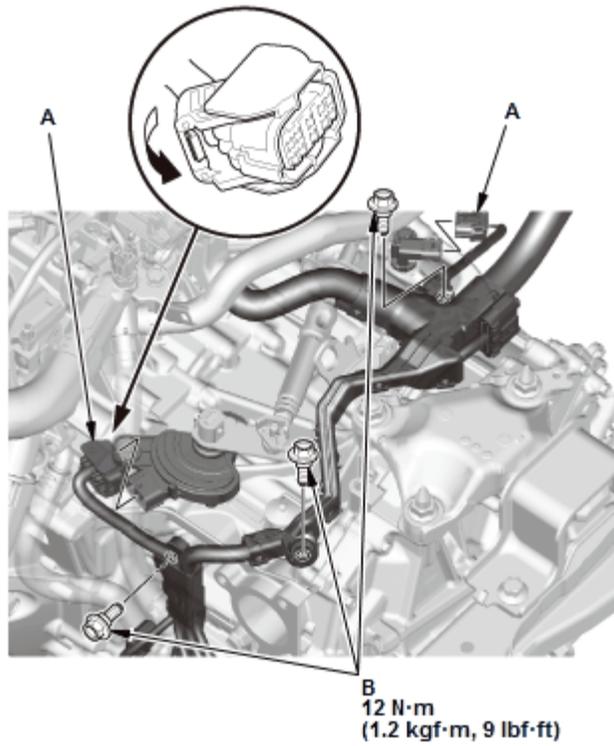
Engine Wire Harness (Transmission Upper Side) With Torque Specifications
